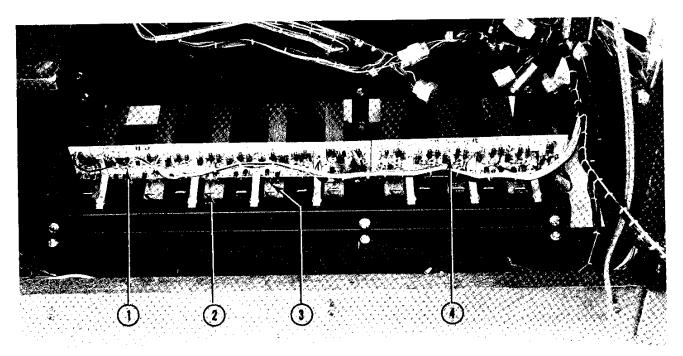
PEDAL SUSTAIN BOARDS ASSY.
